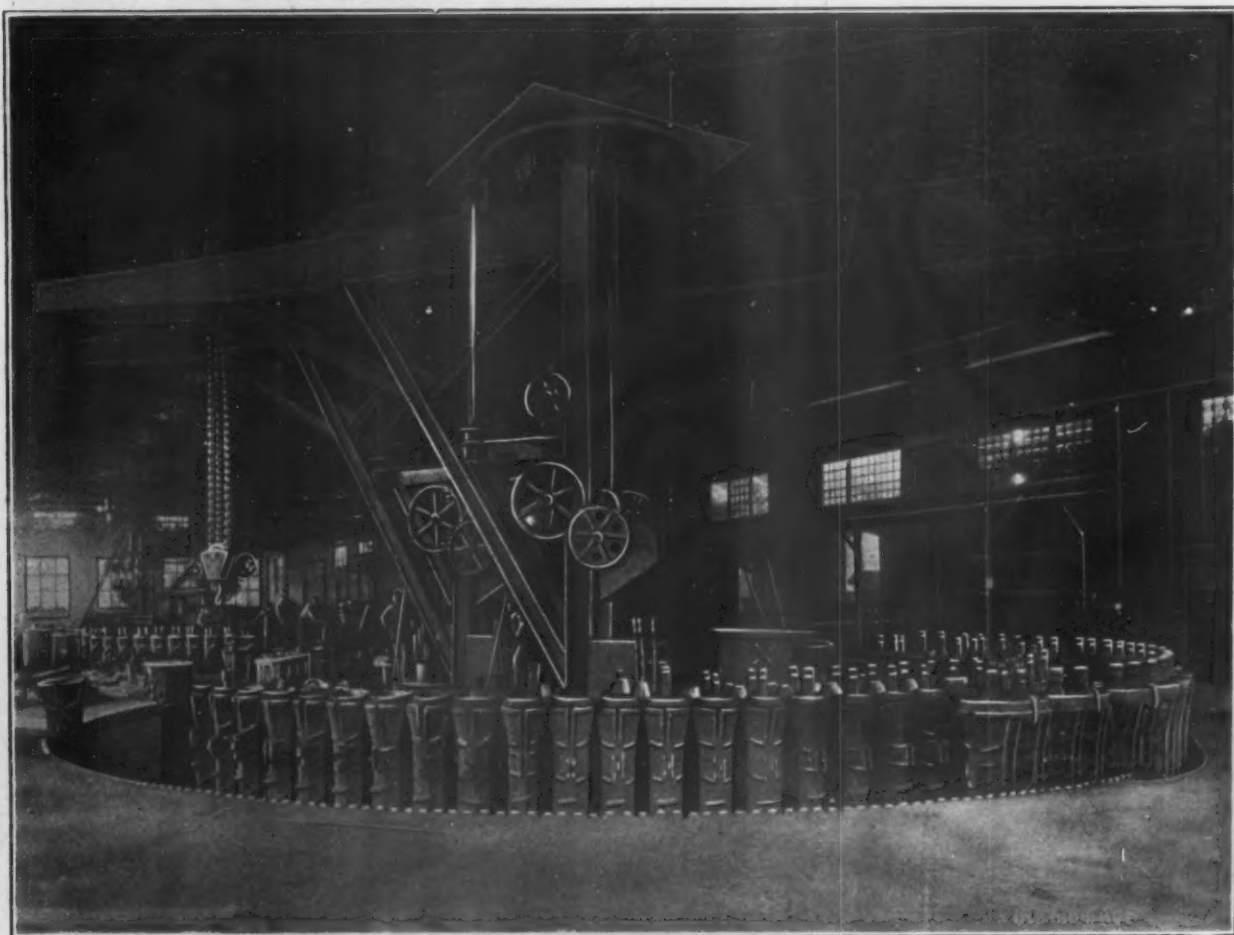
View of Nos. 1 and 2 Casting Pits, American Cast Iron Pipe Company's Foundry, Birmingham, Ala.
